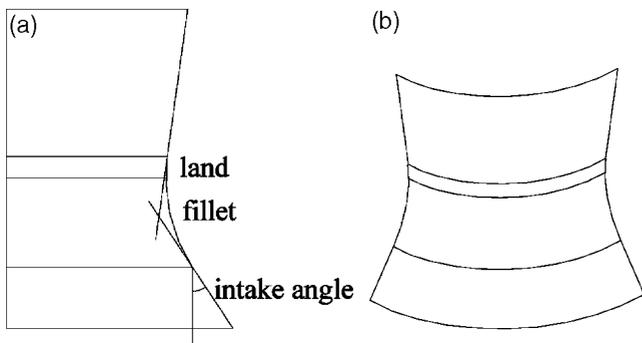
Intake angle of the die with the modified design at stage 3: (a) side view; and (b) isometric view.
